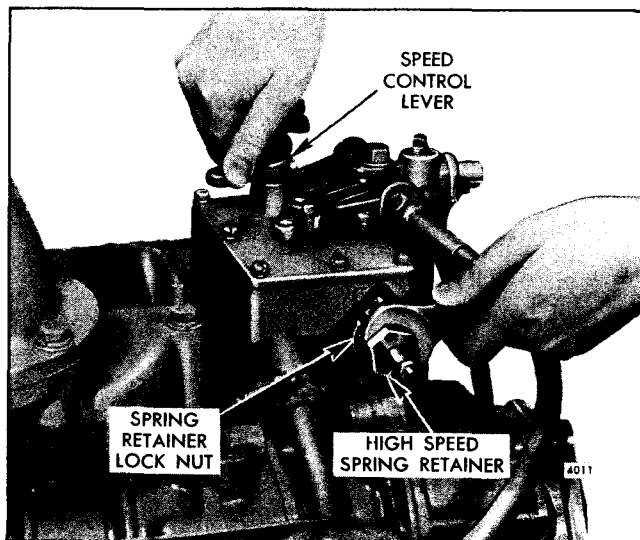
Adjusting Maximum No-Load Engine Speed
